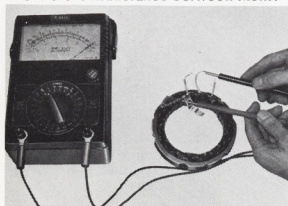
Testing Stator Coil for Open Circuit V1145
